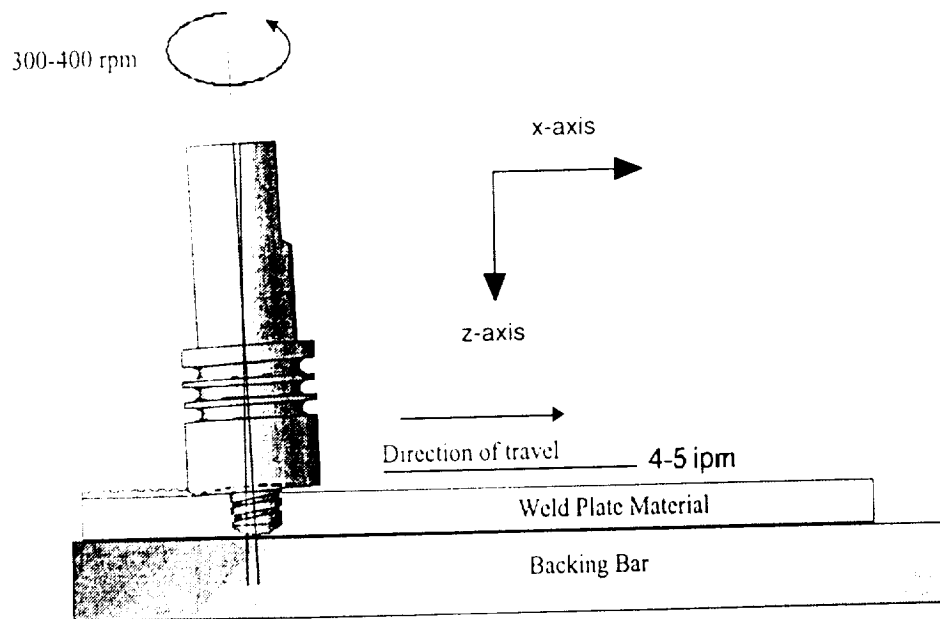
Schematic of FSW Process Using a Single Piece Pin-Tool.
